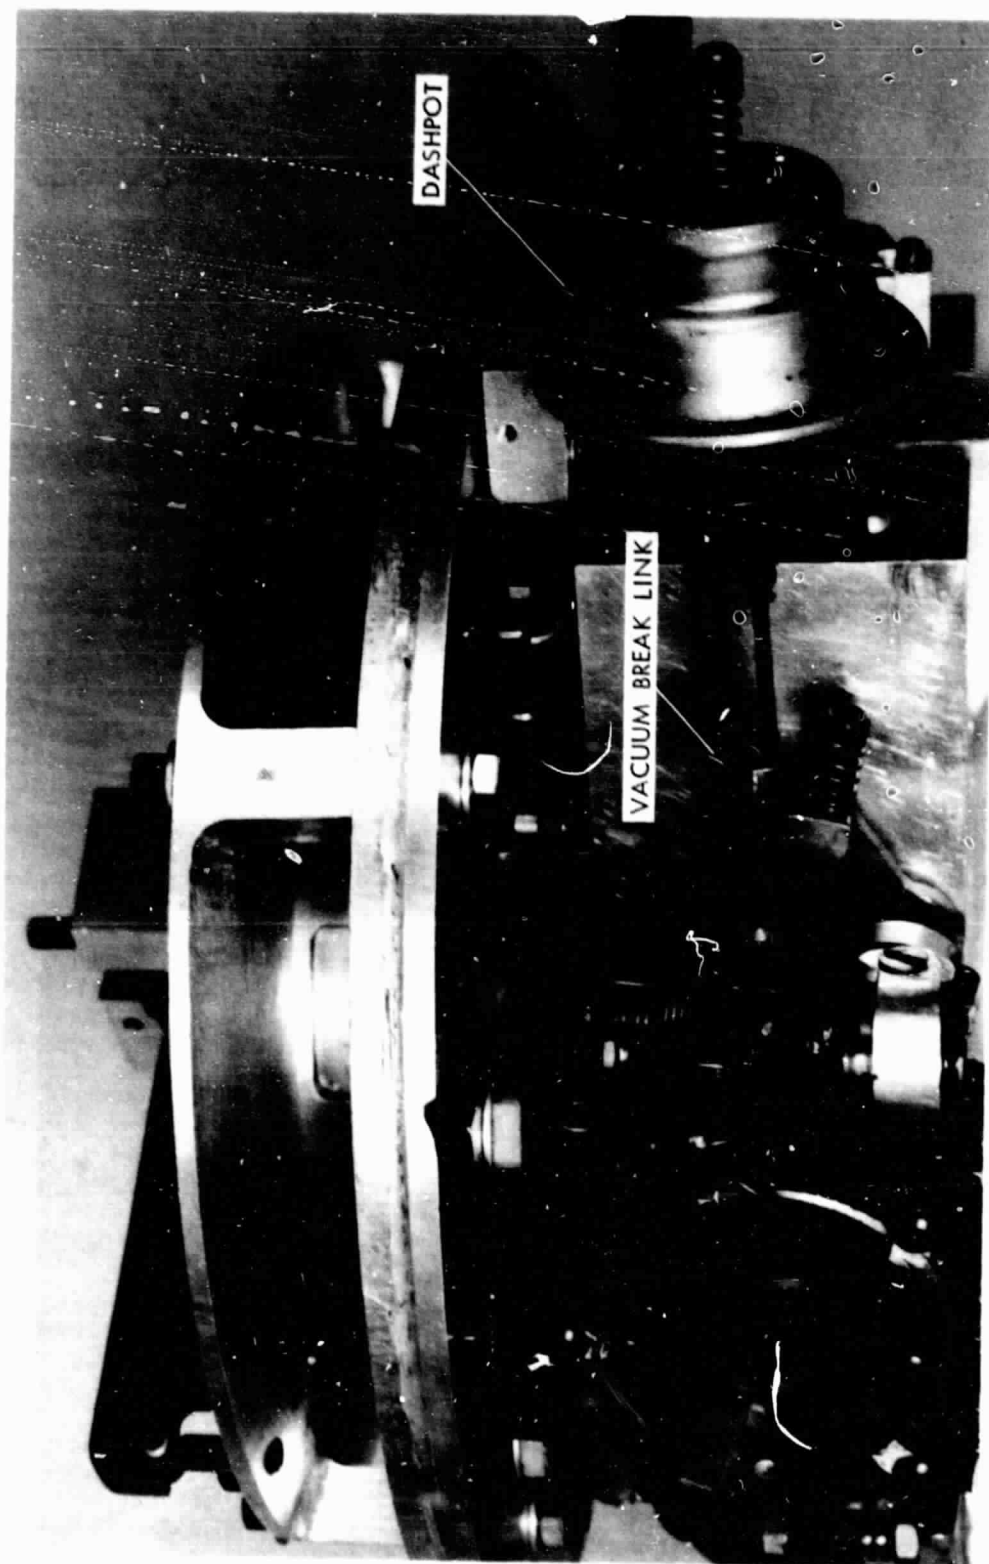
Micro-Carburetor Rotary Choke System - Vacuum Break System
